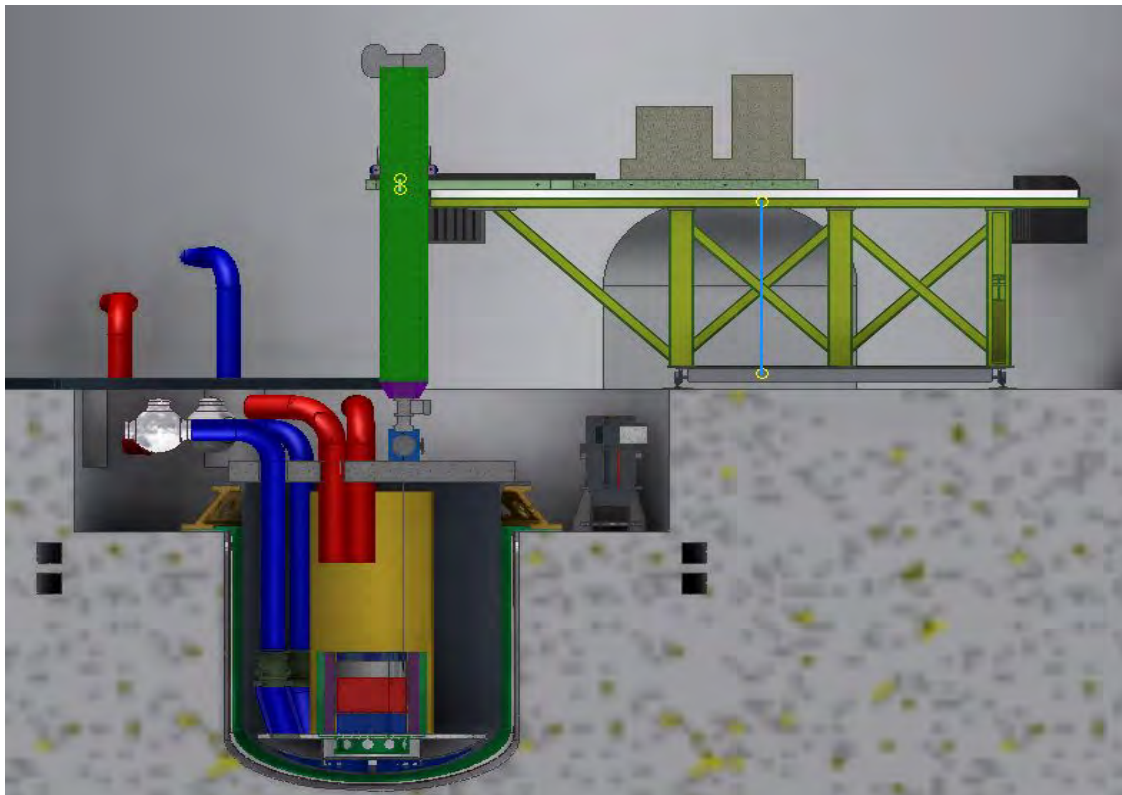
Fuel Unloading Machine – Over Reactor Vessel
